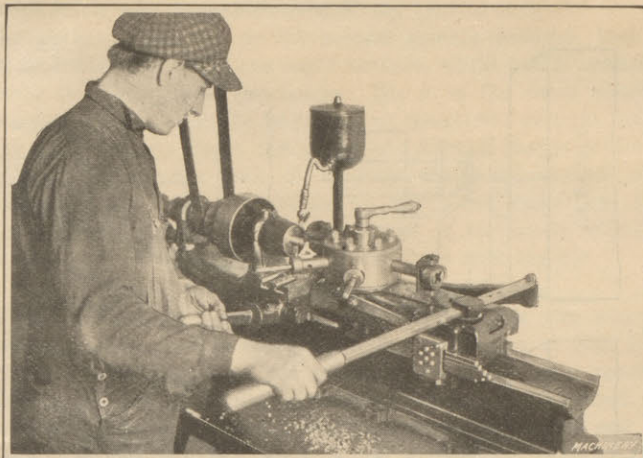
Machining Fuse Parts on F. E. Wells & Son's Hand Screw Machine
